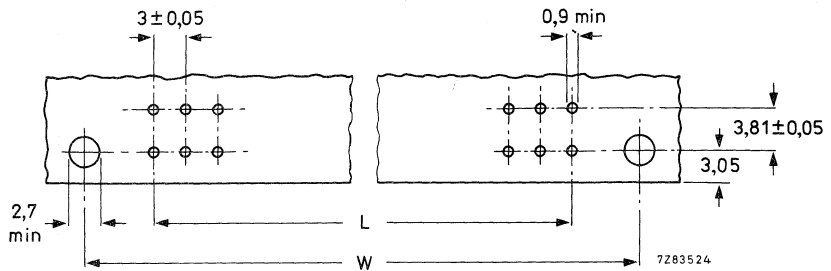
Hole pattern for a male part with 90° angled dip-solder pins.
